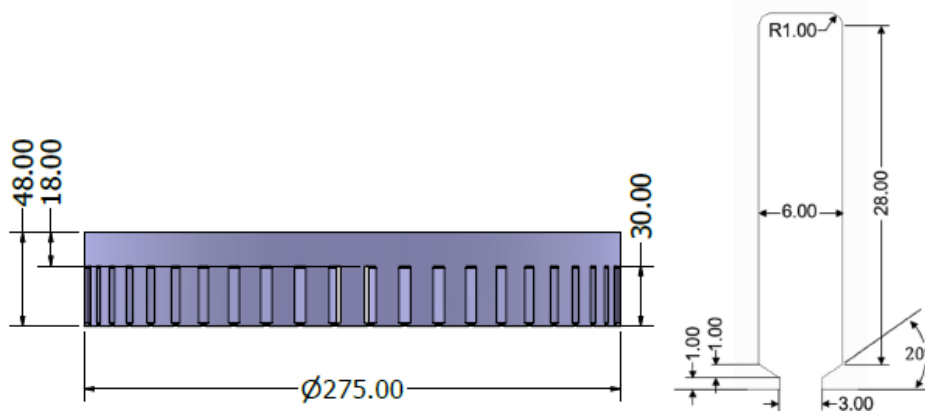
Dimensions of proposed AFIM stator and stator slot dimensions.
